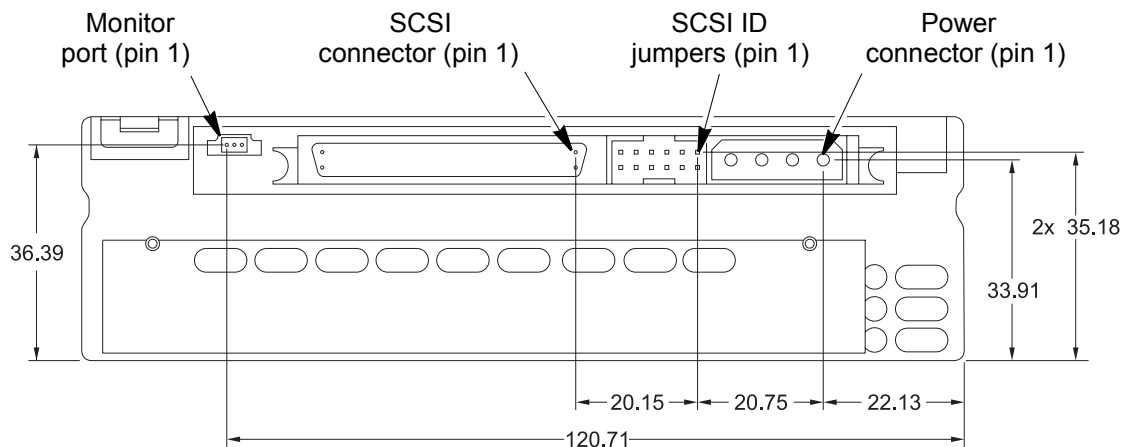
SCSi tape drive back-panel connector and pin locations (in millimeters)
